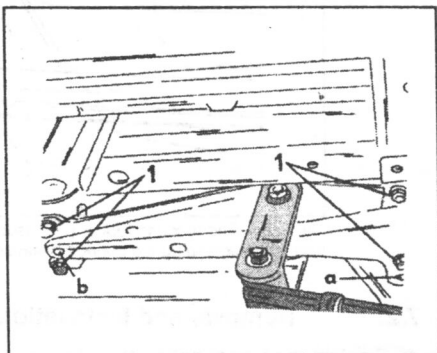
The rear spring mounting bracket must be centred before tightening the bolts (1). Bores "a" and "b" have different diameters.
